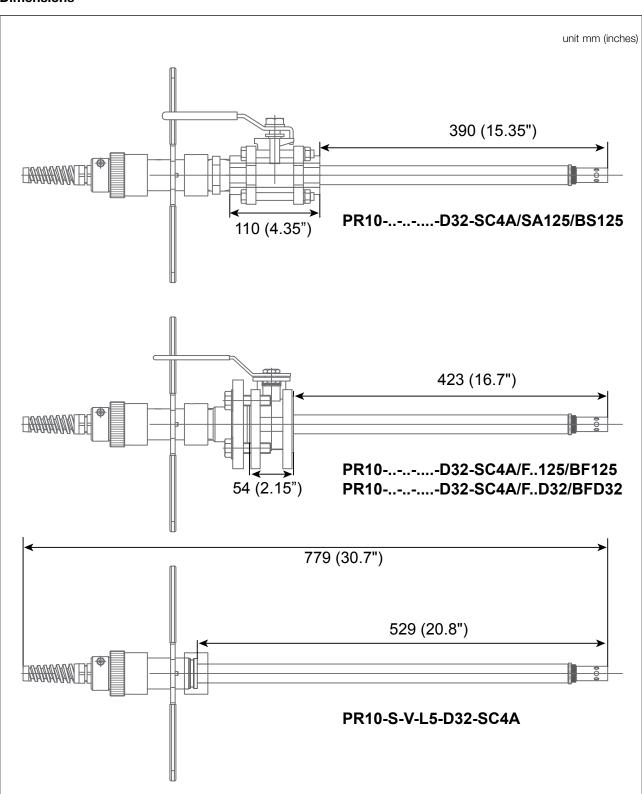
Dimensional drawing PR10...-D32 with mounted SC4A sensor
